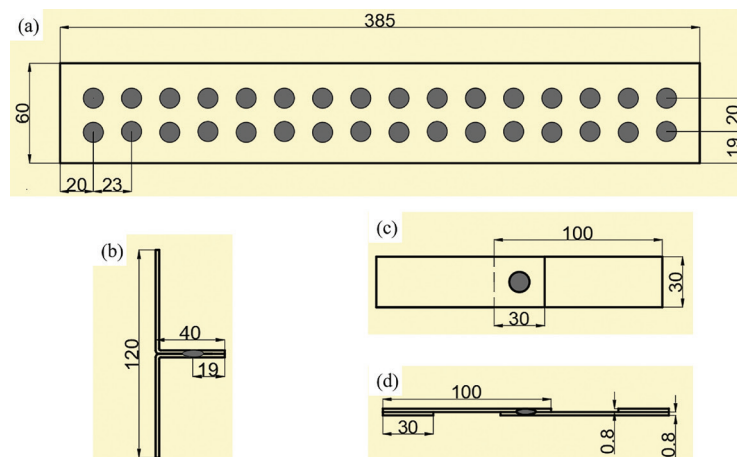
RSW workpieces specification and spot welding spacing (a) of large-sized galvanized steel sheets; (b) used in tearing tests; (c) used in shear tests; (d) used in tensile shear test.
